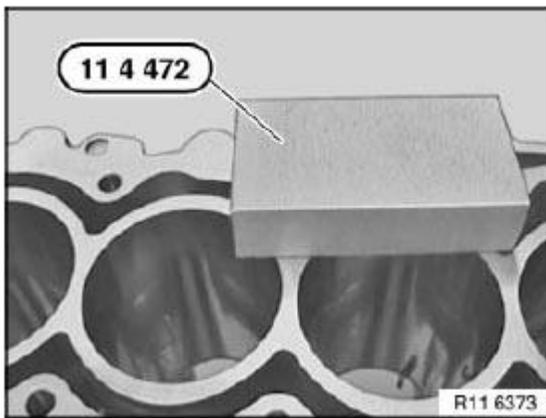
Remove Fine Residues On Sealing Surfaces Using Special Tool 11 4 472
